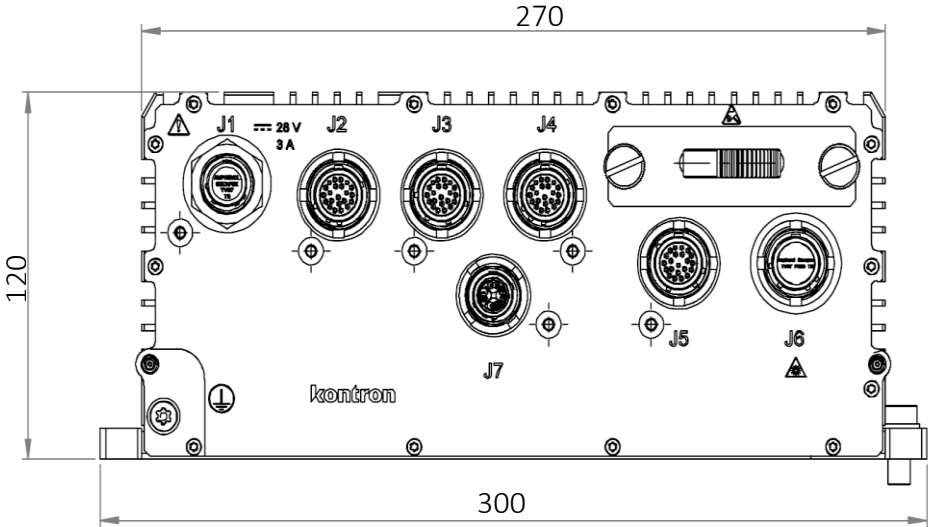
DARC-VX208-H - Dimensions – Top view (in mm)
